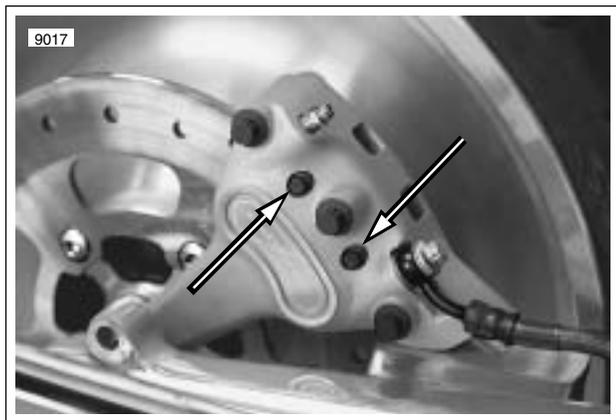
Rear Caliper Pad Pins (12 pt/0.25 in.)
